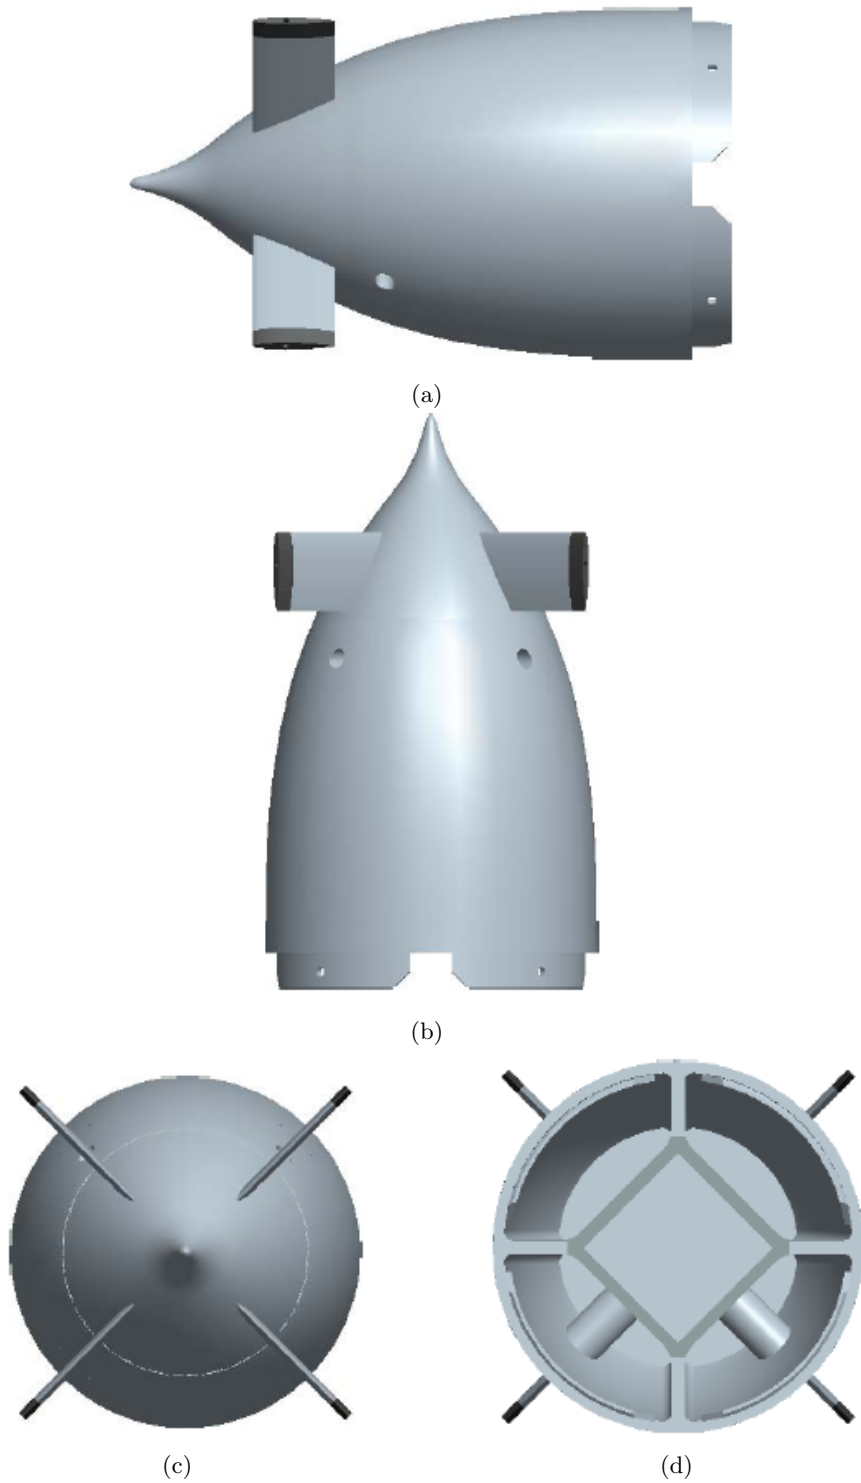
CAD Rendering of Contraction Cone (a) Side View (b) Bottom View (c) Front View (d) Back View
